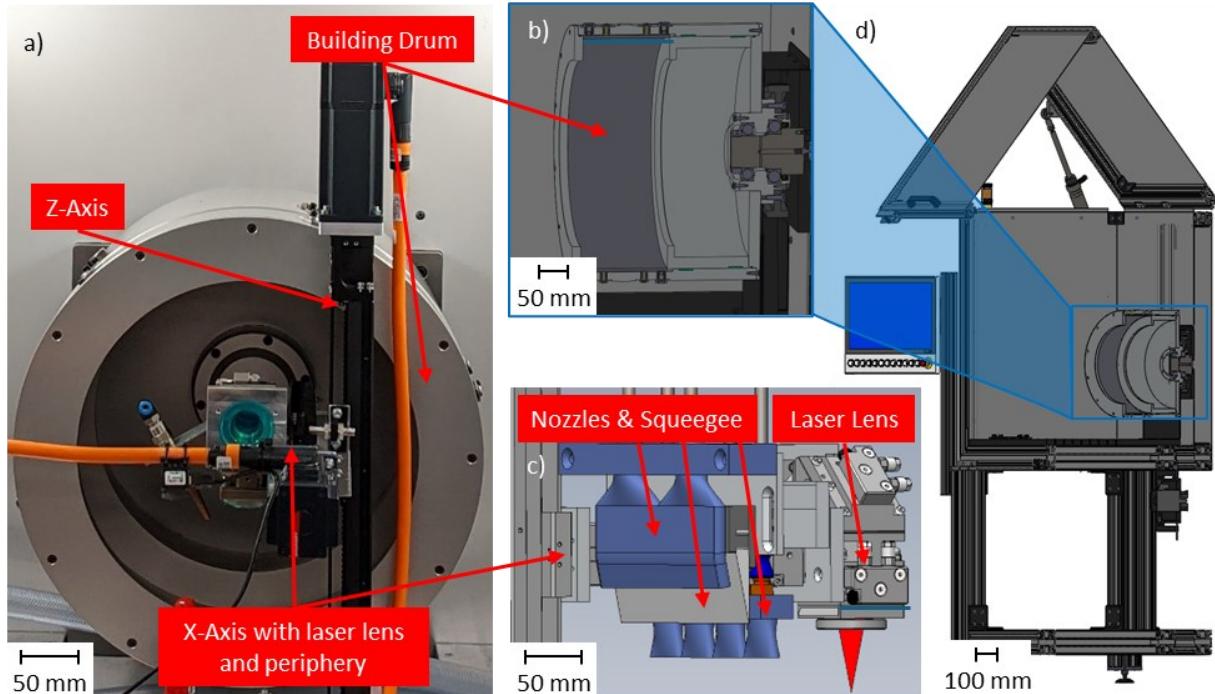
(a) picture of the RotaPrint test rig including axis system and laser optical head; (b) Close up CAD model substrate ring and centered bearing; (c) CAD model of nozzle and squeegee periphery on the axis system; (d) CAD model of RotaPrint test rig including building drum.
